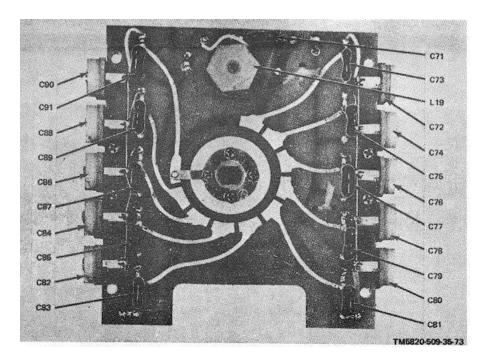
Oscillator Control C-4311/PRC-47 (A8A7), Card Assembly E5.
